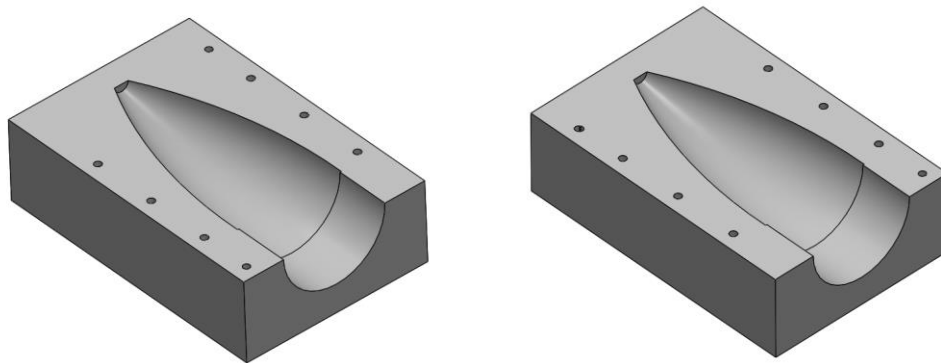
On left, nose cone half-mold shape with press-fit dowel pin holes; on right, nose cone half-mold with opposing slip-fit pin hole and slot.
